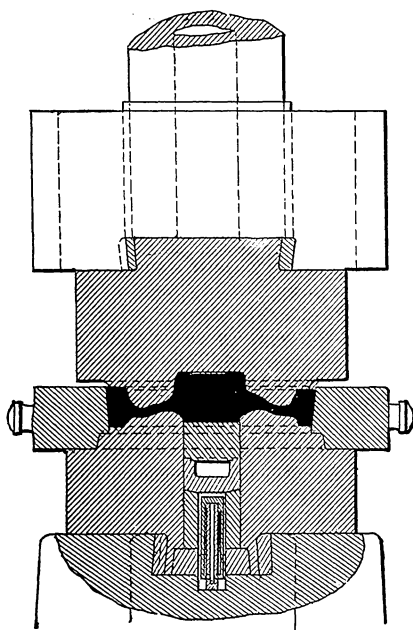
Vertical Section of Dies and Wheel Blank.
